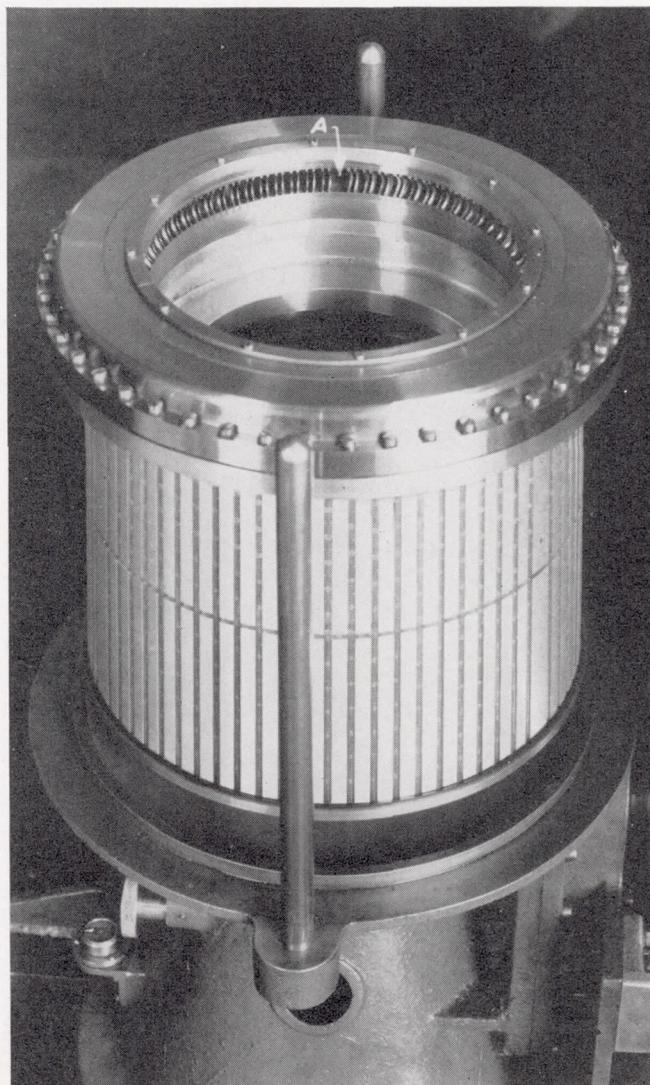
Rotor assembly, view showing vanes and receiver compartments.
